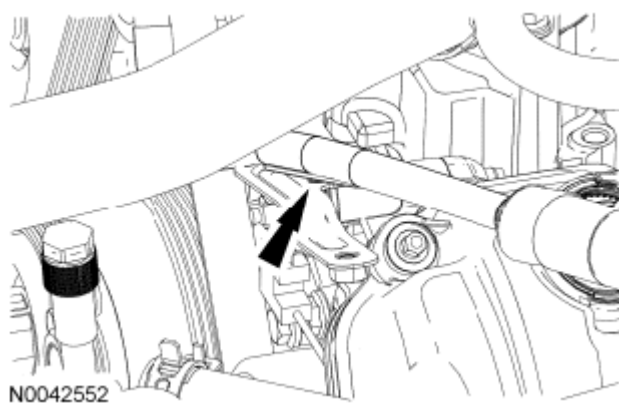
Locating Wiring Harness Retainer From Cooling Fan Wiring Harness Bracket
